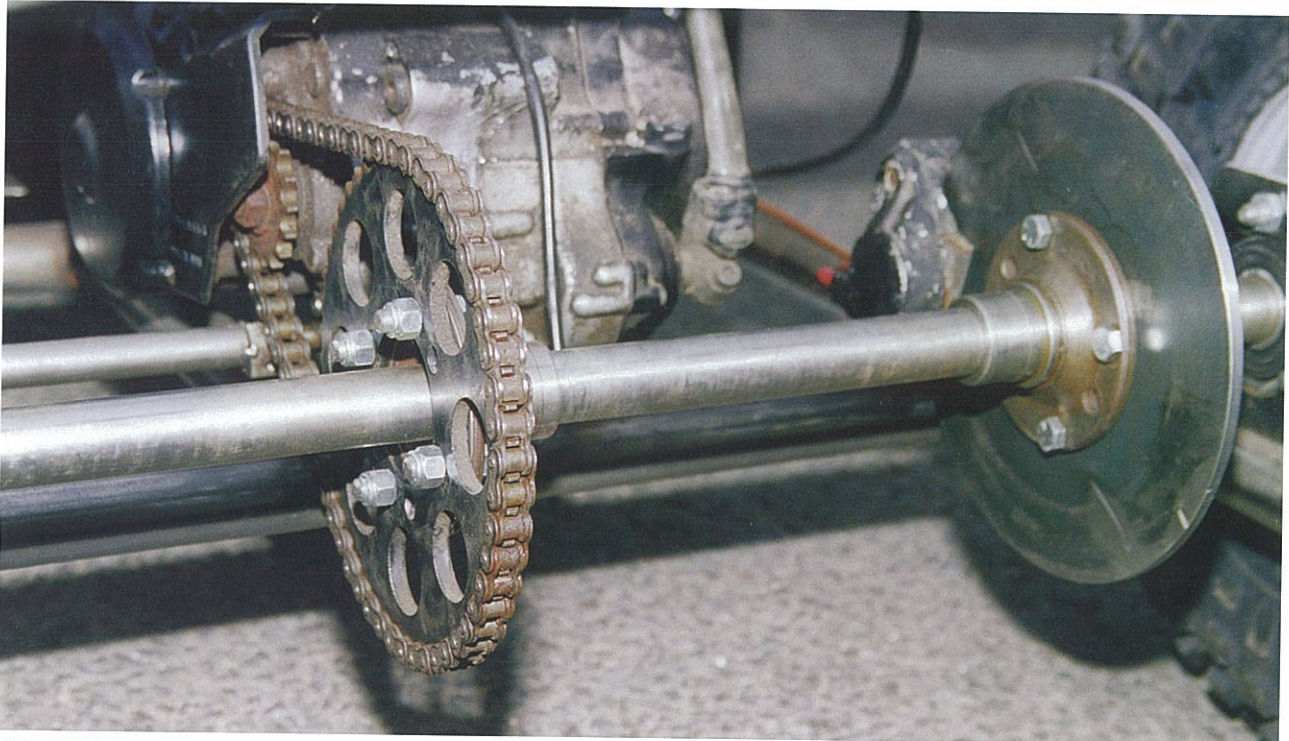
The main items used from the donor motorcycle are the engine, gearbox, brake caliper, disc, sprocket and chain. (Steve Williams)
